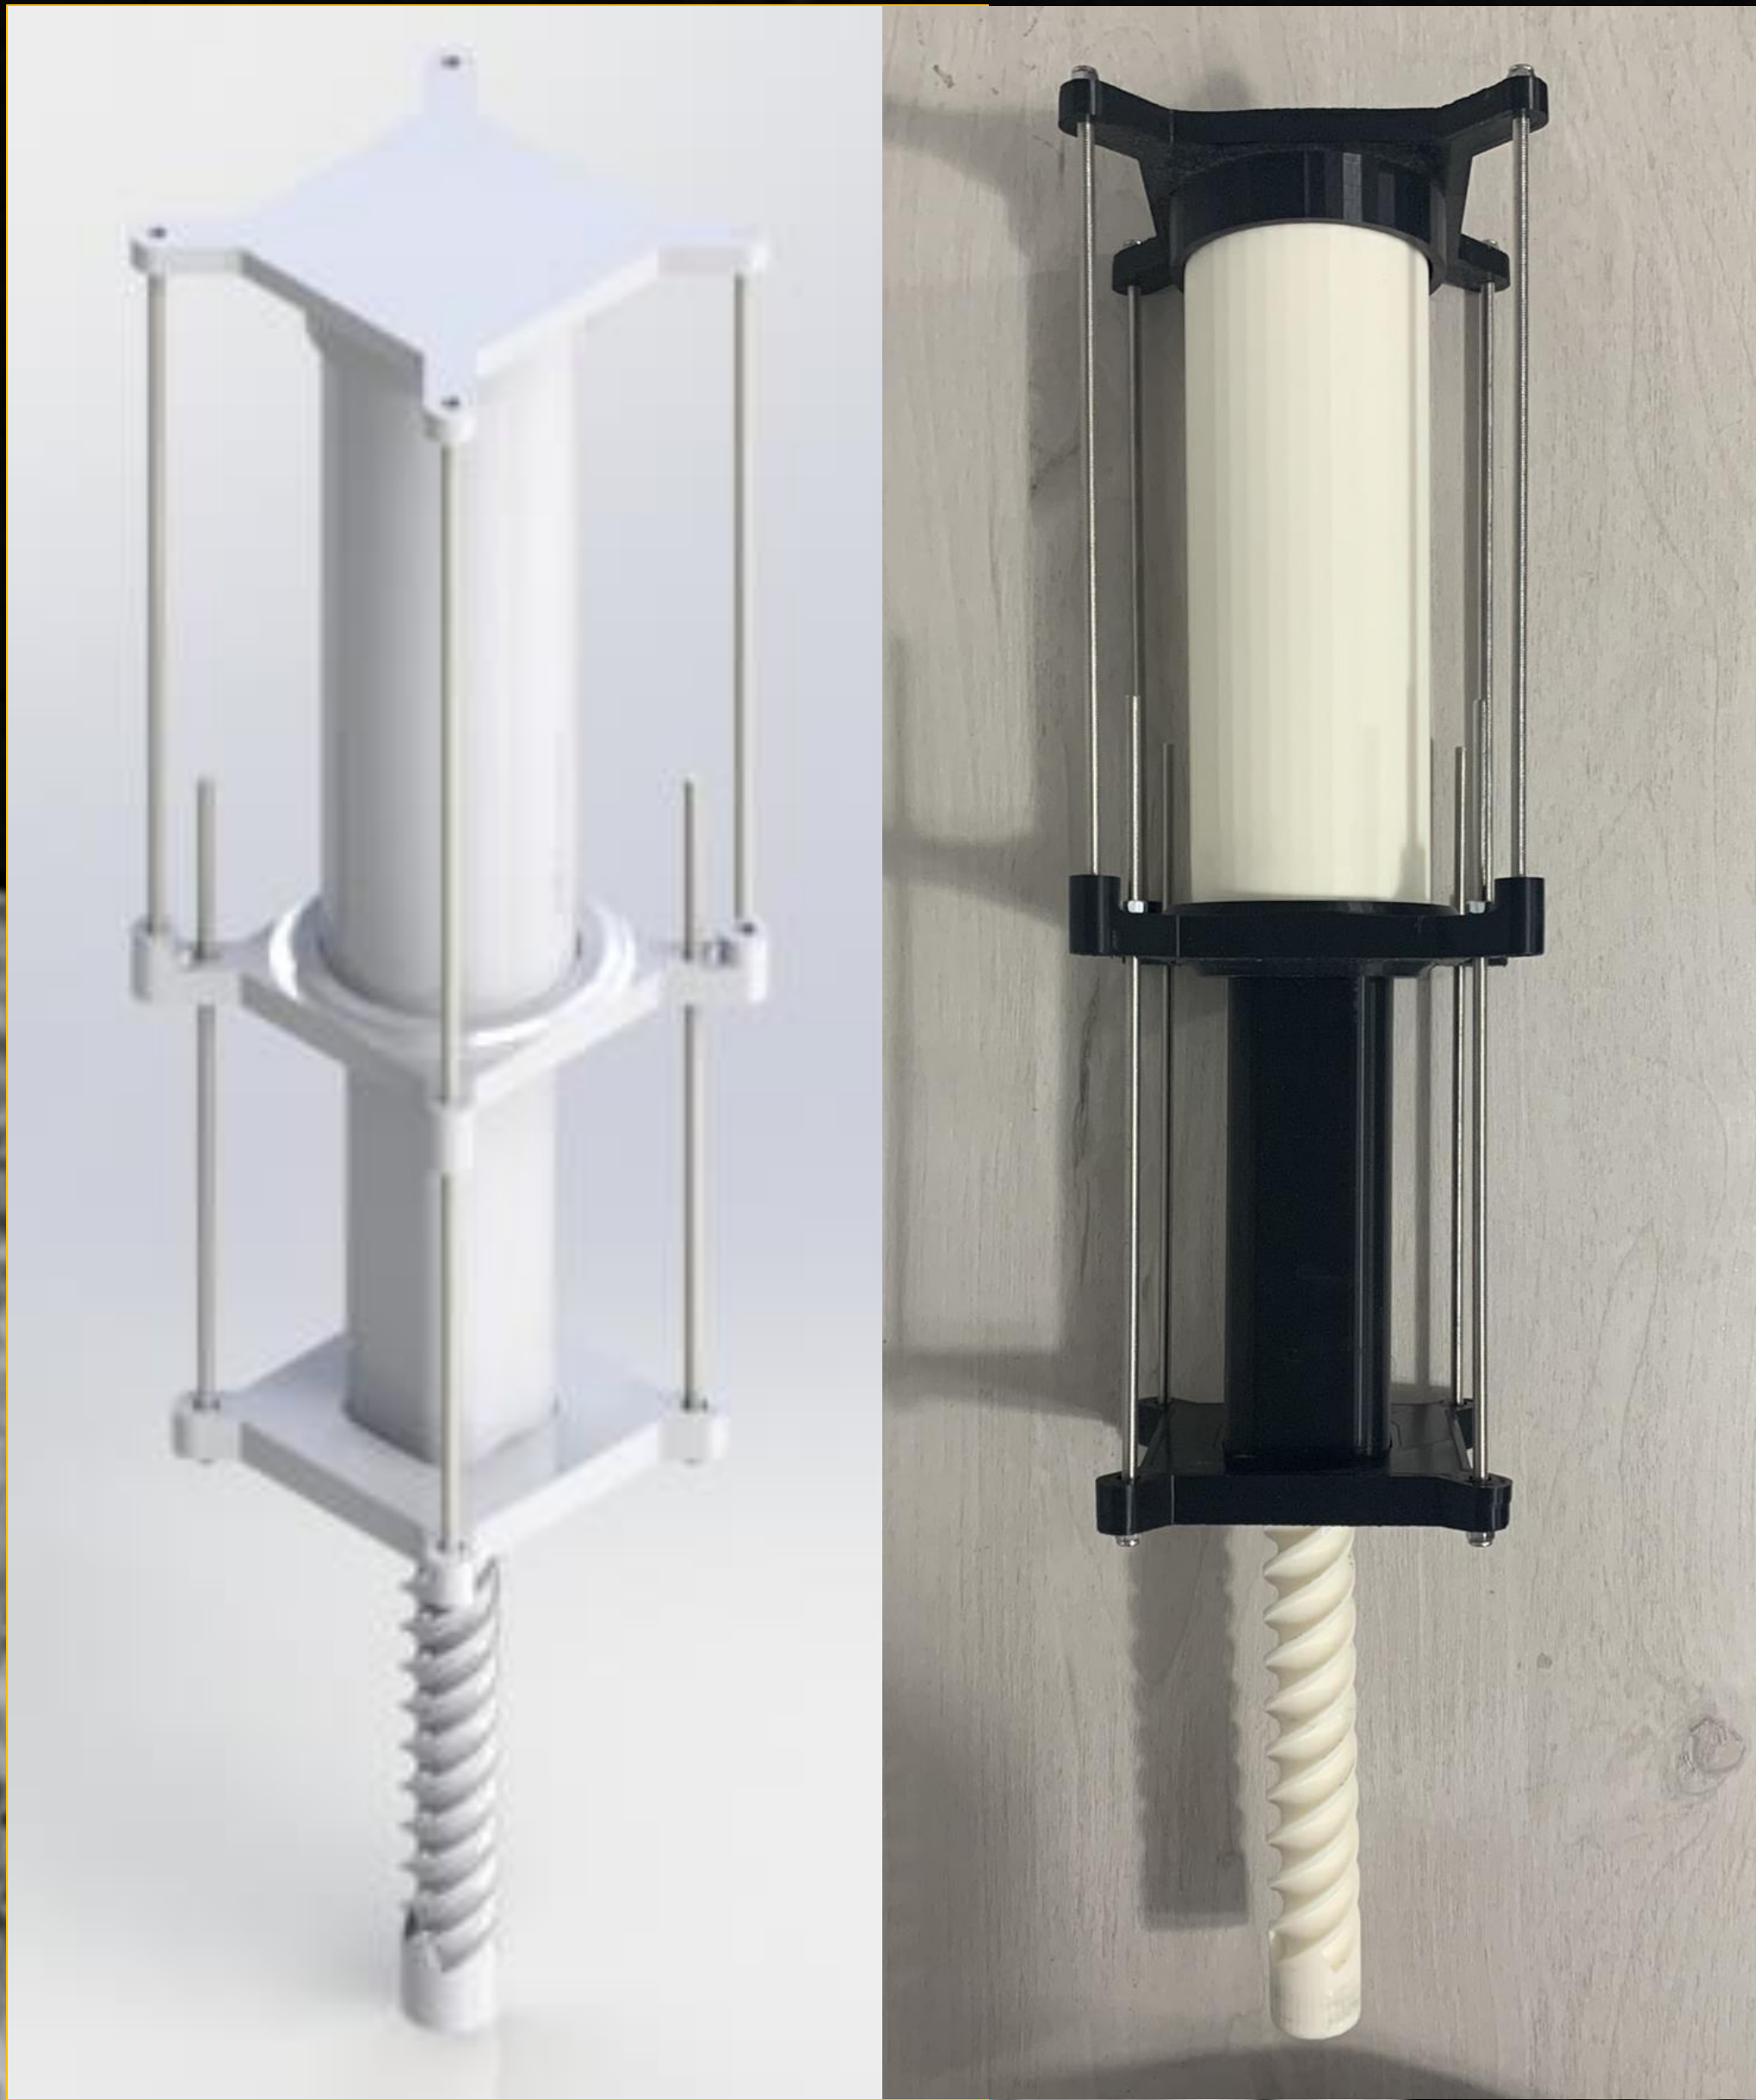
Yankee Screw Punch fully assembled. Rendered in SOLIDWORKS 2020 (left), and fully assembled prototype (right).
